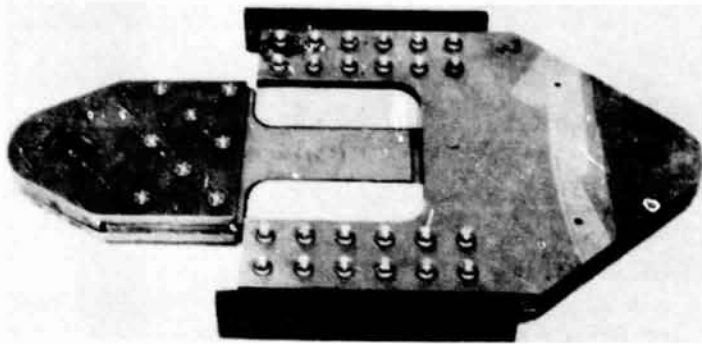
Web Splice Test Specimen and Fixture (122407B)
